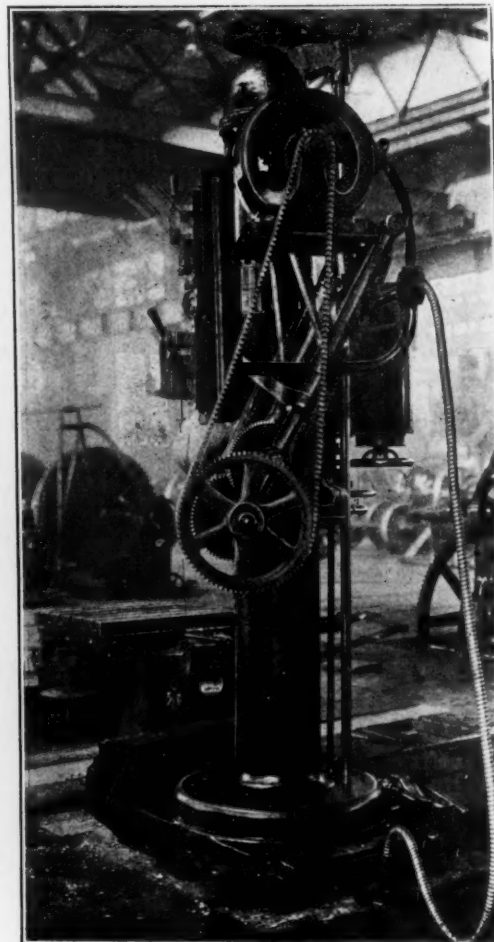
REAR VIEW OF THE DRILL, SHOWING METHOD OF MOUNTING THE MOTOR UPON THE BRACKET.
